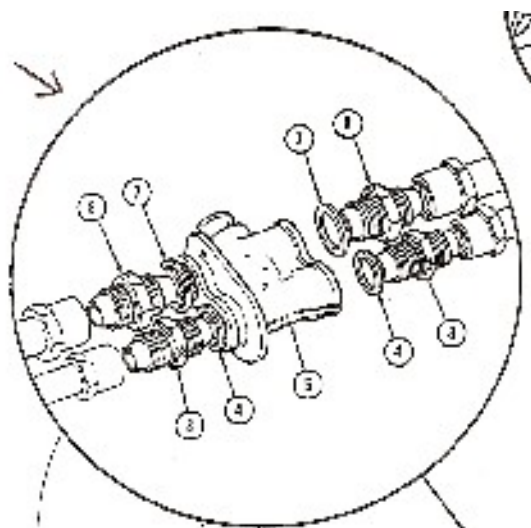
Nr 5 part number 7T/543. Valve assembly relief LP(GFP)
